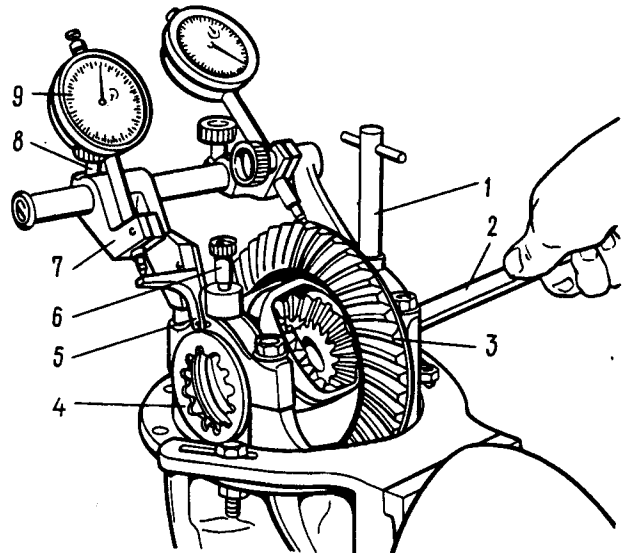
Checking Preload of Differential Case Bearings with Gauge A.95688/R:
